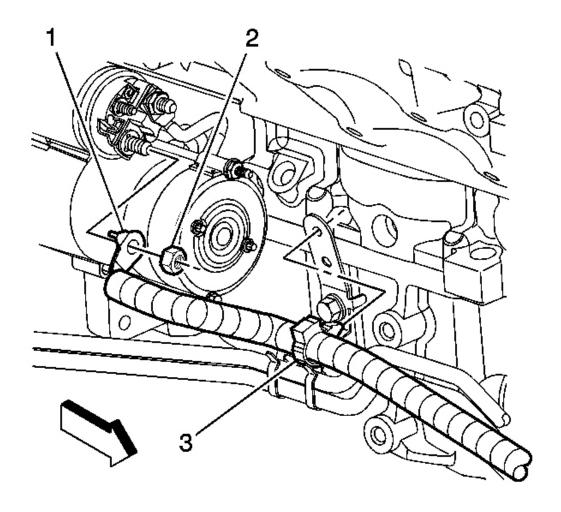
View Of Starter Solenoid Lead & Nut Courtesy of GENERAL MOTORS CORP.
